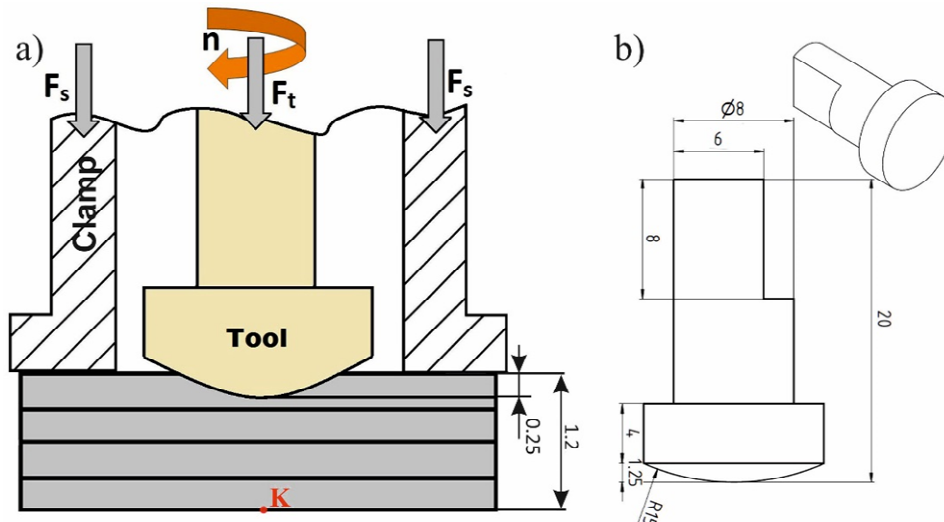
a) FSSW tool setup (F - force on the tool) and b) details of tool geometry
